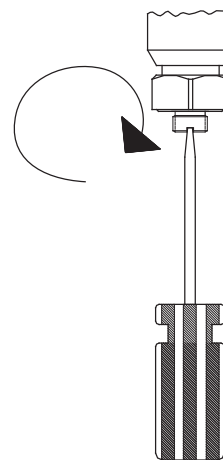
Mounting stud is tightened to recommended torque with appropriately sized hex Allen key.
